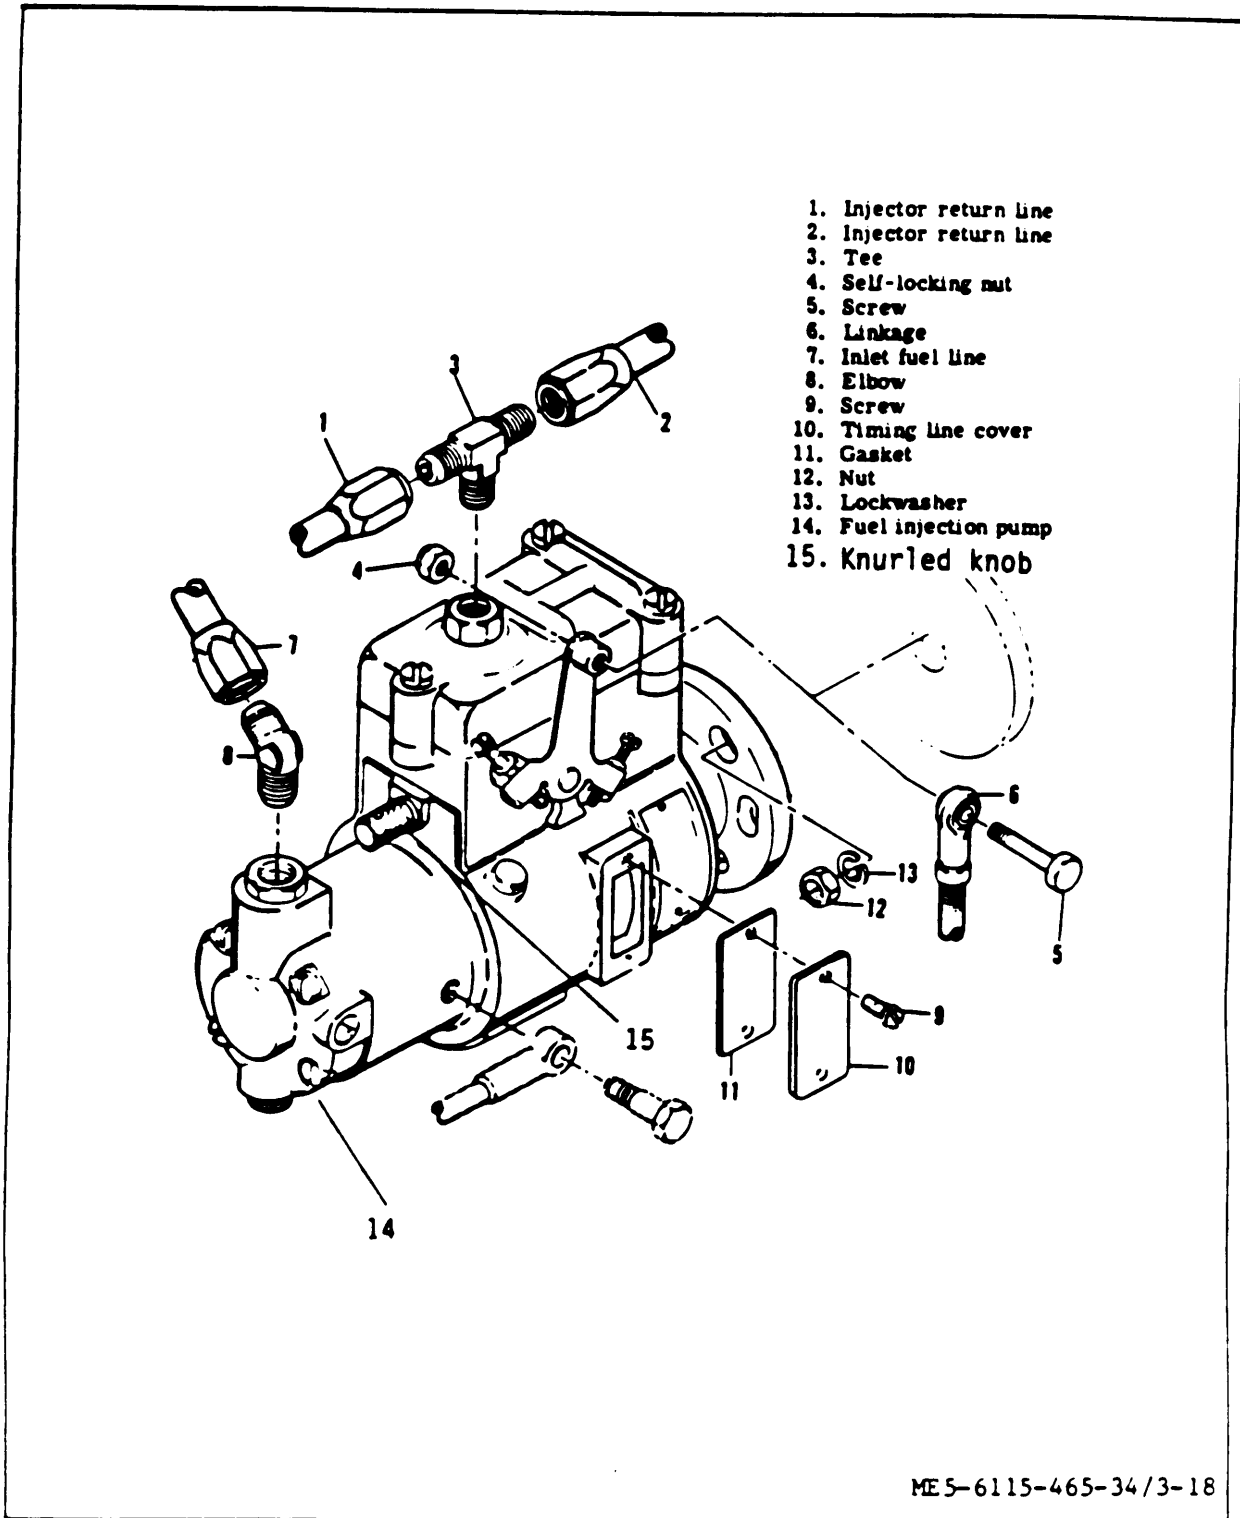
Fuel Injection Pump Assembly, Removal and Installation
